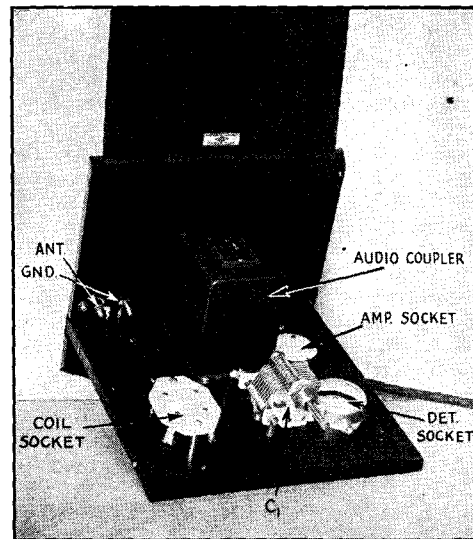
TOP VIEW OF THE BASE ASSEMBLY
